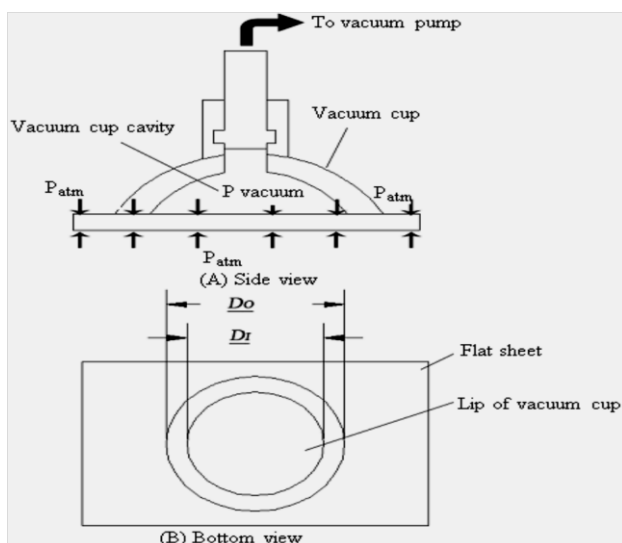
Vacuum cup used to lift a flat sheet [5]
